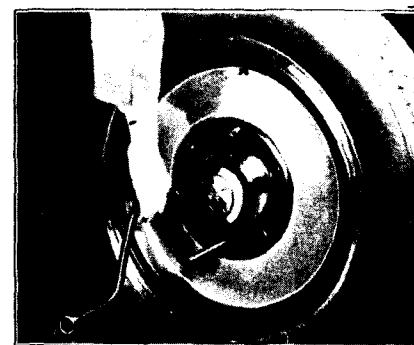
In mounting disc wheels, use the rear end of the brace wrench as a pilot bar.
